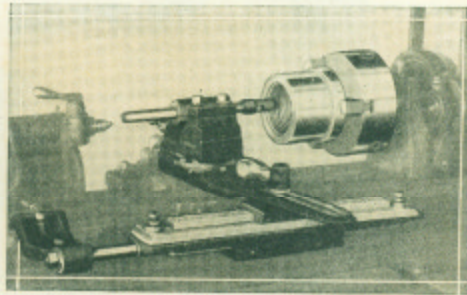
Cutting an Internal Tapered Thread with the Taper Attachment
